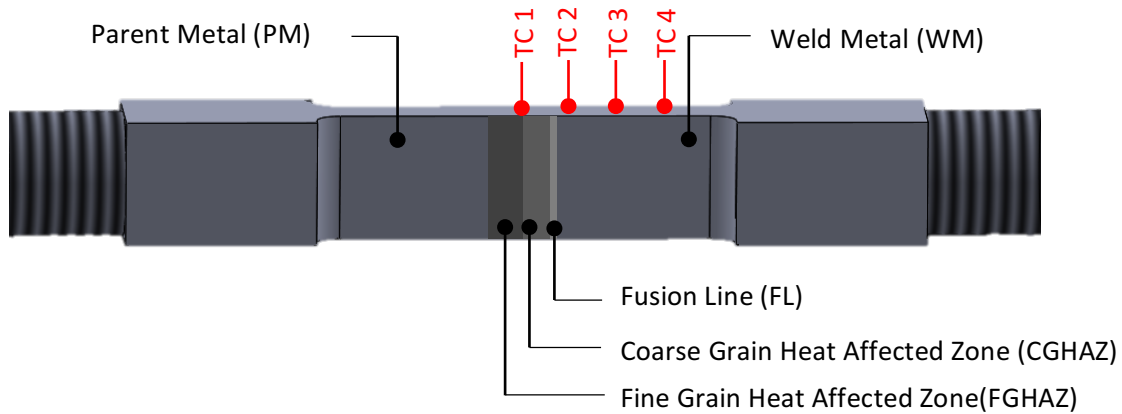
Schematic of a tensile specimen illustrating the placement of thermocouples.
